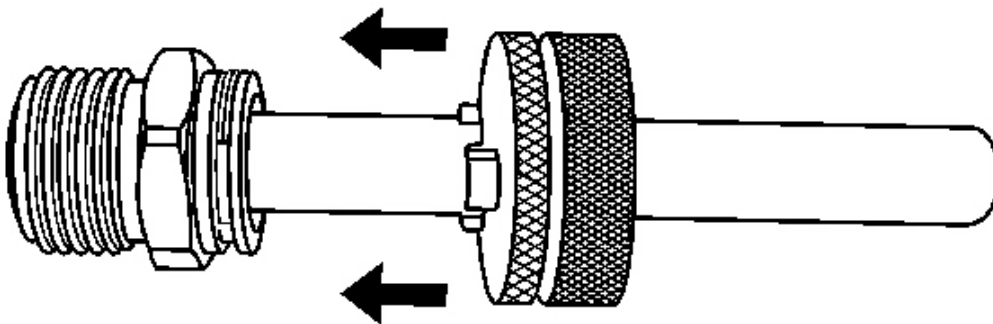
Sliding J 41623-B Toward Generator Cooling Inlet Pipe Fitting
